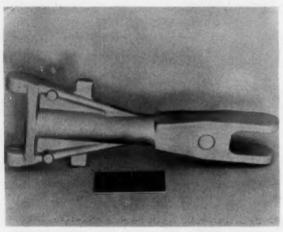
Link casting illustrating surface finish of part cast in machined graphite mold.
